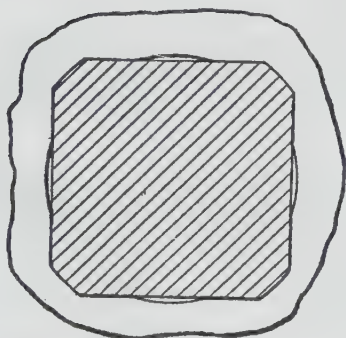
BROACHED SLIDING GEAR WITH PART OF FLAT RELIEVED.
